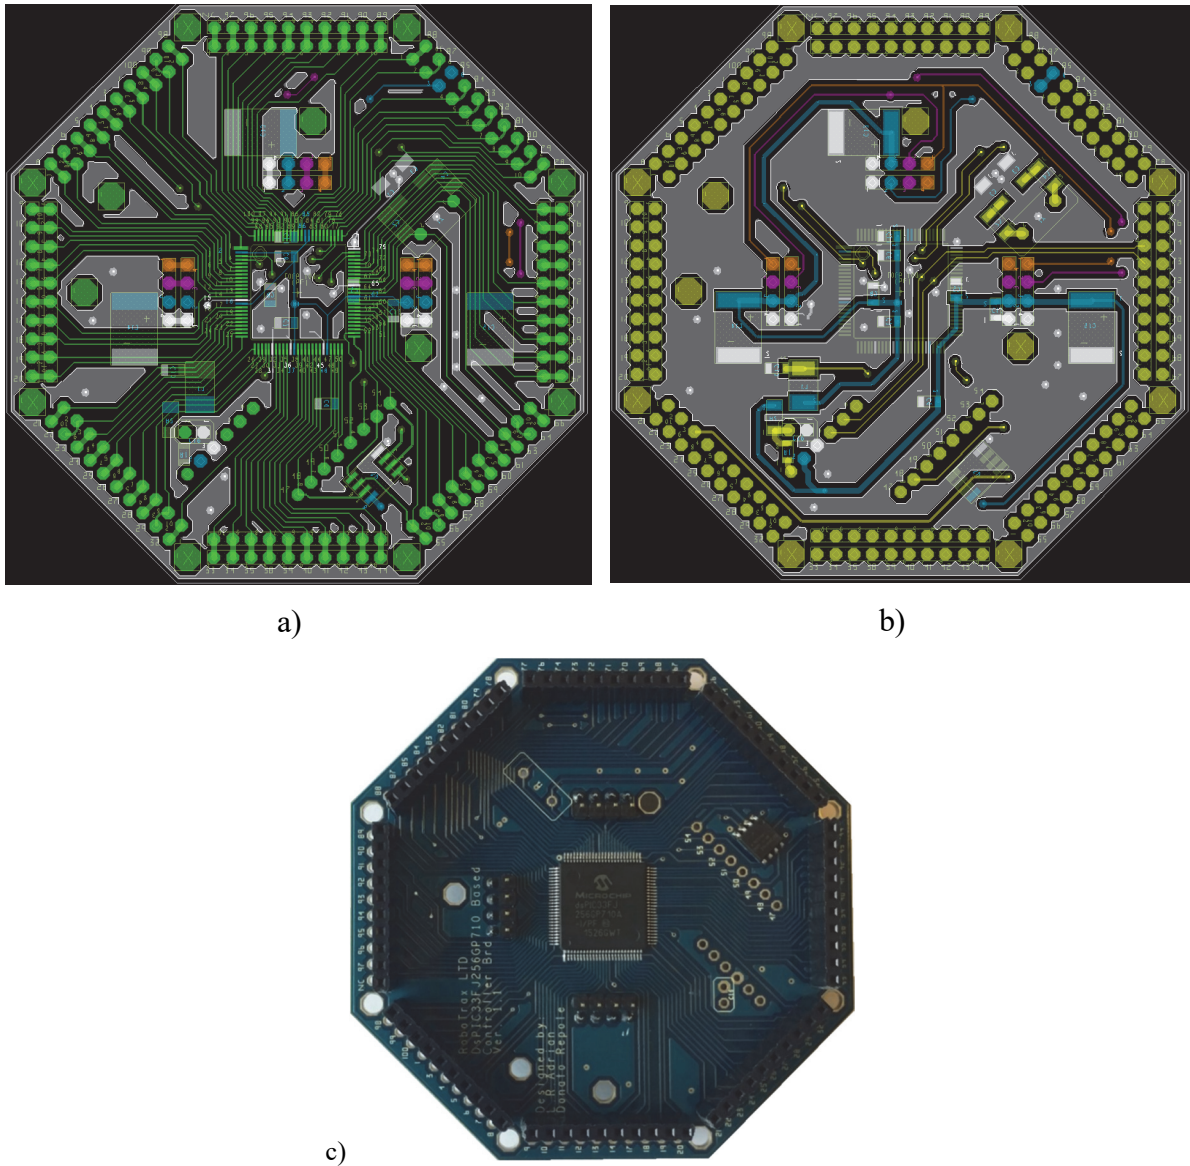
MCU Wafer PCB, a) board front b) board back and c) completed board
